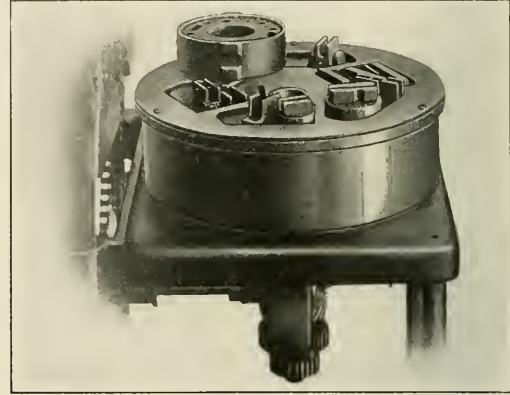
Close-Up of Rotary Portion with Air Brake Parts Being Lapped
